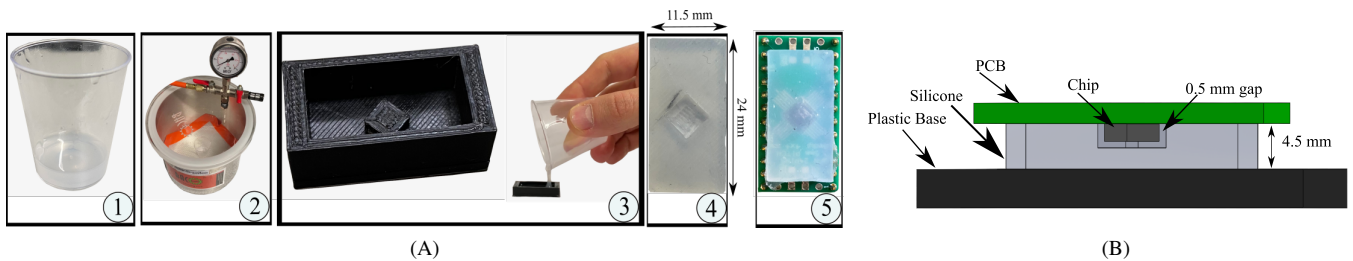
Fabrication process of the multimodal tactile sensor. (A) Steps for fabrication of the soft rectangular case of the sensor: 1) rubber liquids are mixed, 2) material degassing using a vacuum chamber, 3) rubber is poured in the mould to form a rectangular case, 4) cured soft rectangular case, 5) chip covered with the soft case. (B) Soft case attached on the PCB and mounted on a plastic base creating a sandwich configuration.
